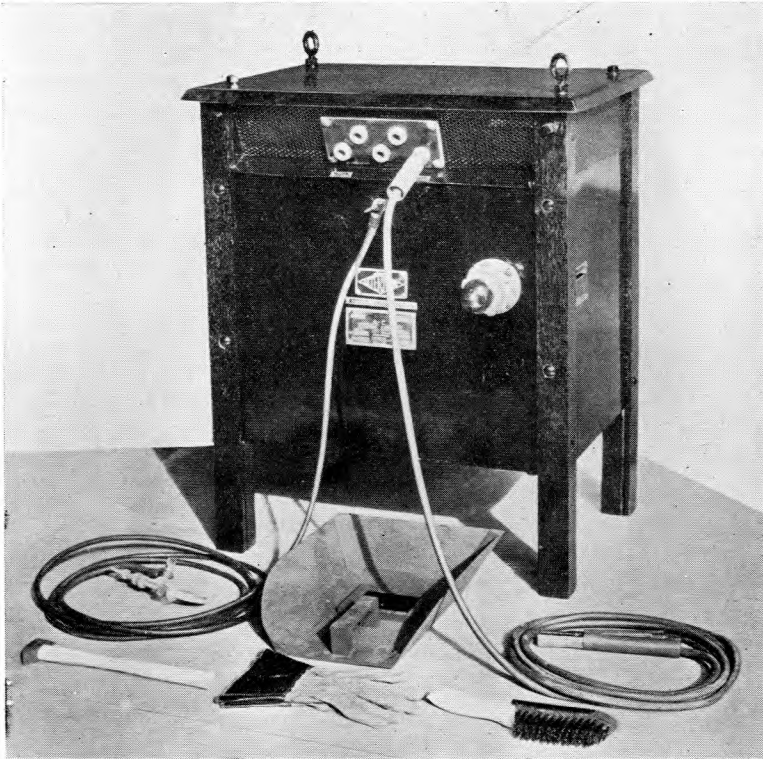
A.C. WELDING EQUIPMENT.
